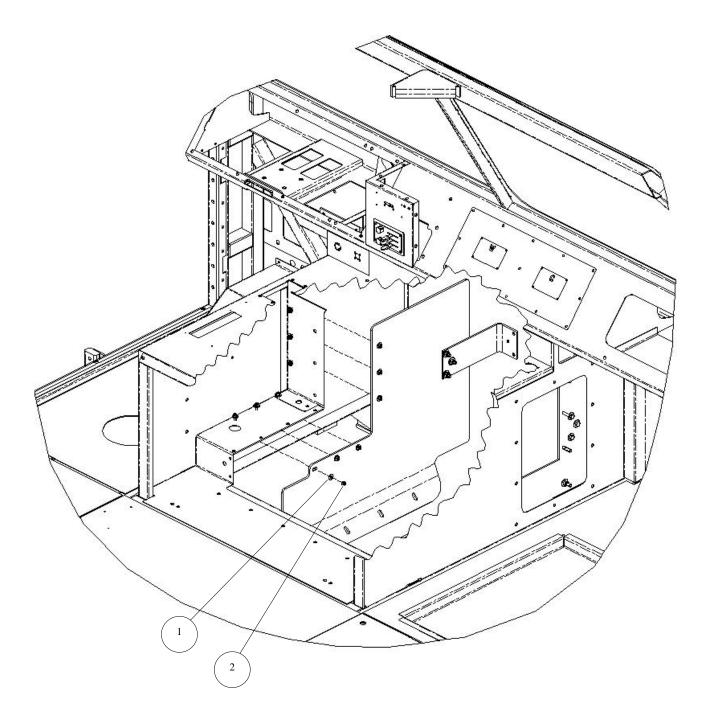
Doghouse Left Panel Pre-Assembly.
